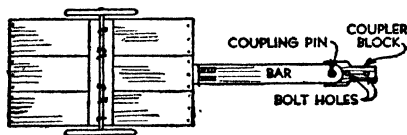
PLAN OF TRAILER CHASSIS AND COUPLER
